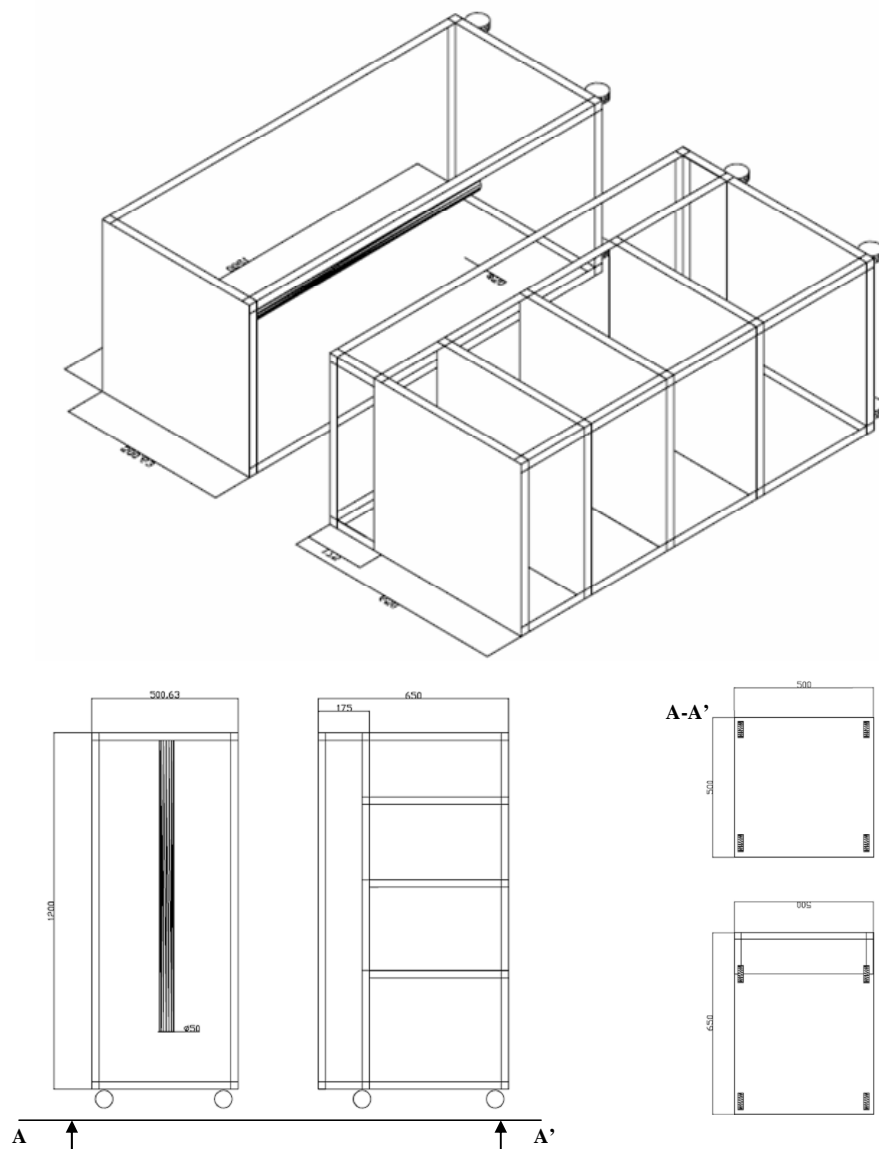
FlexSMB-LSRE® structure in CAD scheme; dimensions in mm.
